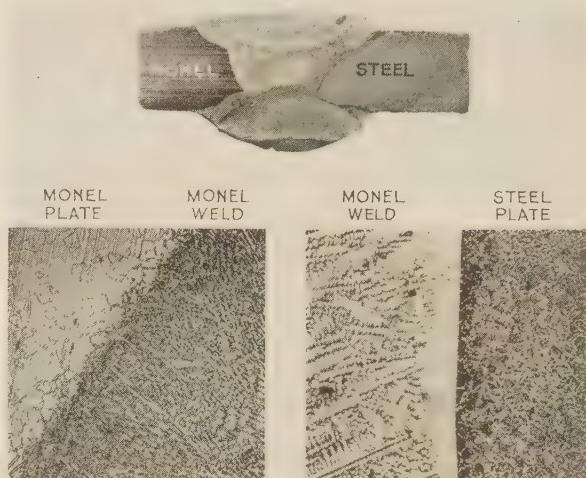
PHOTOMACROGRAPH AND PHOTOMICROGRAPHS OF MONEL METAL WELDED TO STEEL PLATE
